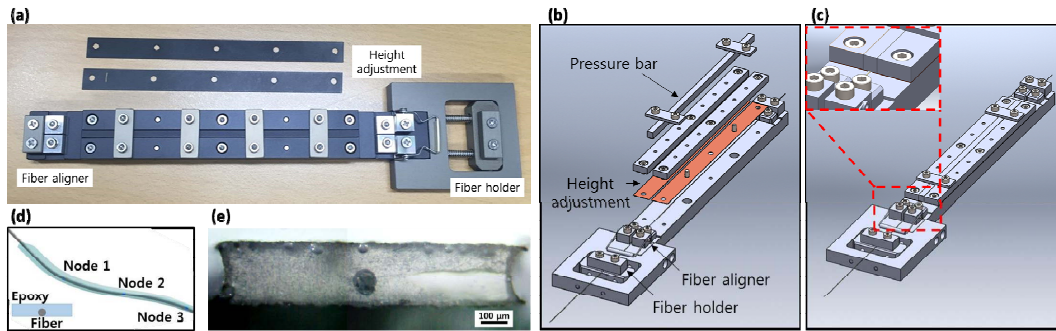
(a) Fabrication jig of FBG angle sensor. (b) and (c) show components of jig and assembling method. (d) Concept design of angle sensor and (e) cross-section of fabricated FBG angle sensor
